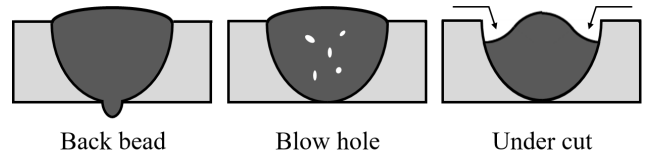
The type of weld defect considered to evaluate the results of CMT welding
